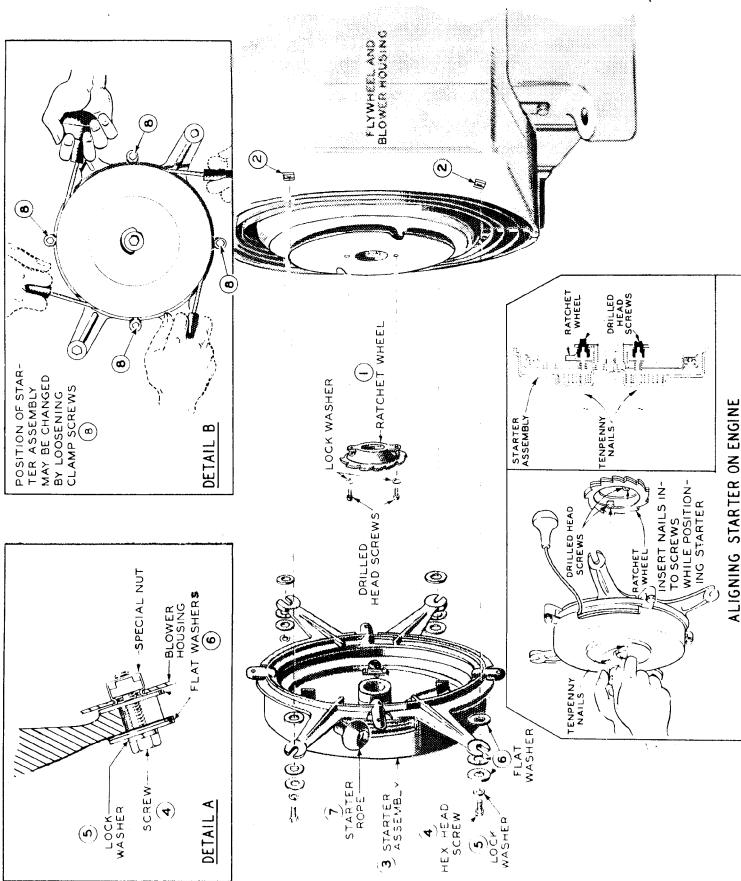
INSTALLING (Model D) READI-PULL STARTER
